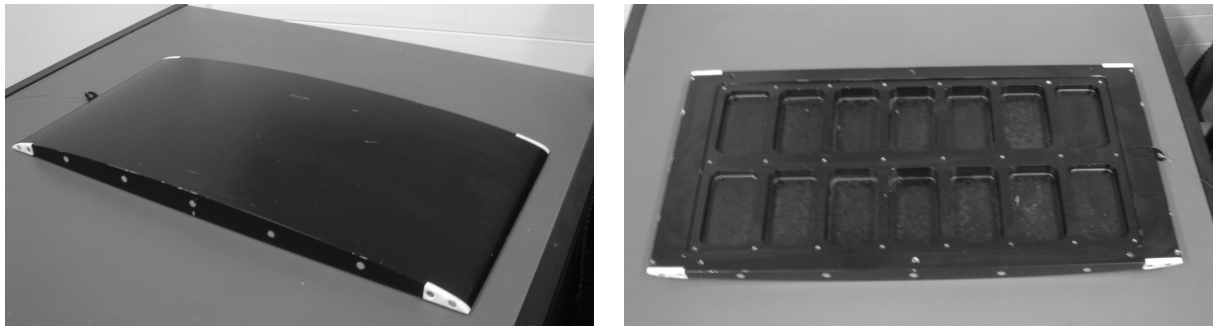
Photographs of the upper and lower surfaces of the aluminium sliding block.
